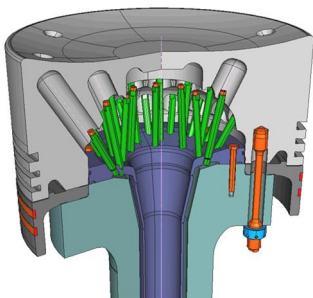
W-X62 section, showing the three piston rings and cooling concept
